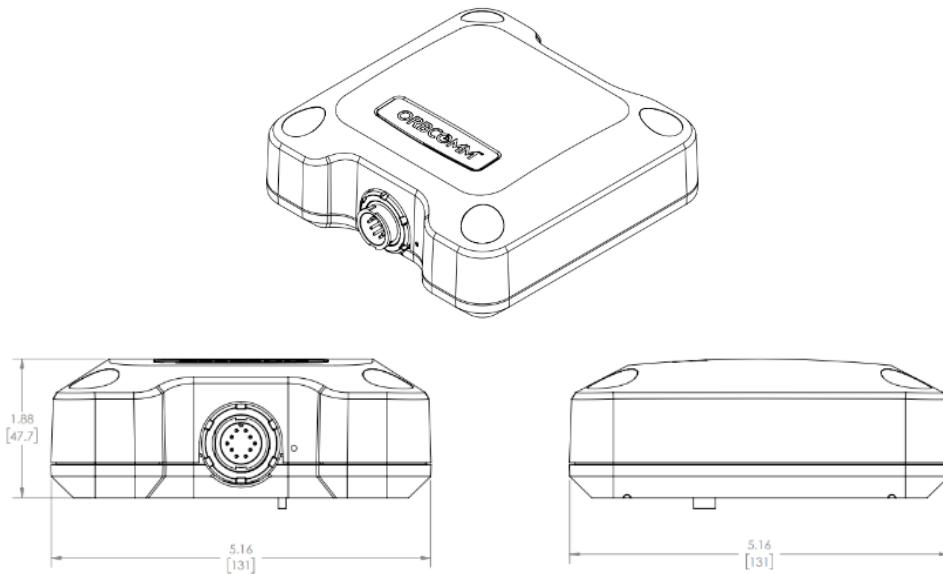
ST6200 Top View of Bottom Connector Enclosure
